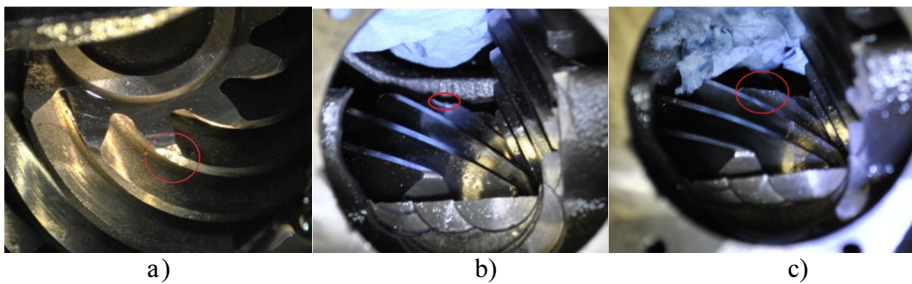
Defects of the hypoid gear: a) condition 1; b) condition 2; c) condition 3
